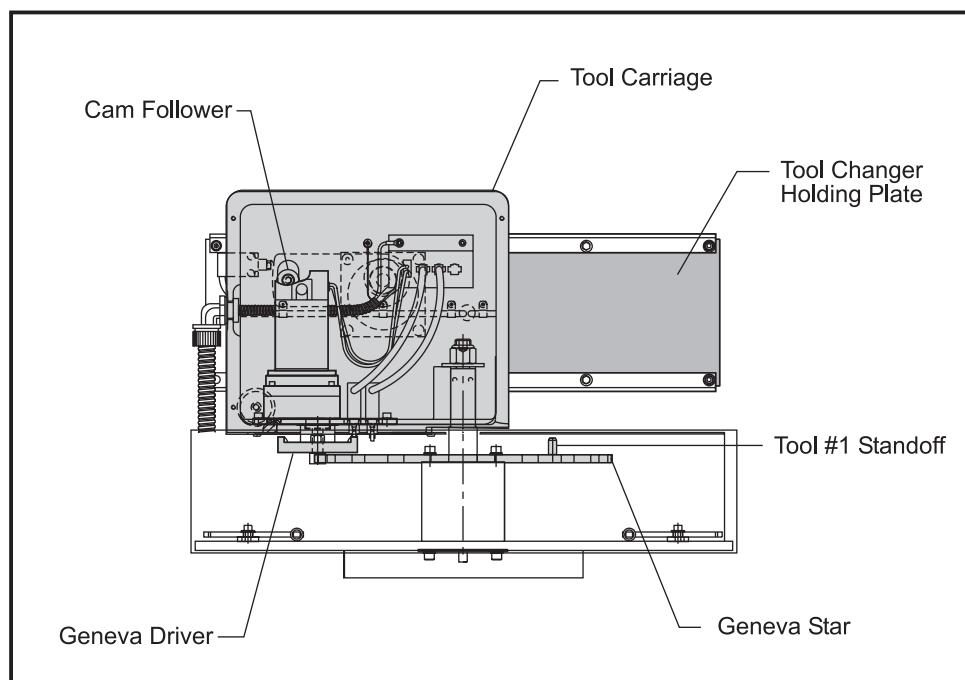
Automatic Tool Changer - Mechanical Assembly (Side View)
